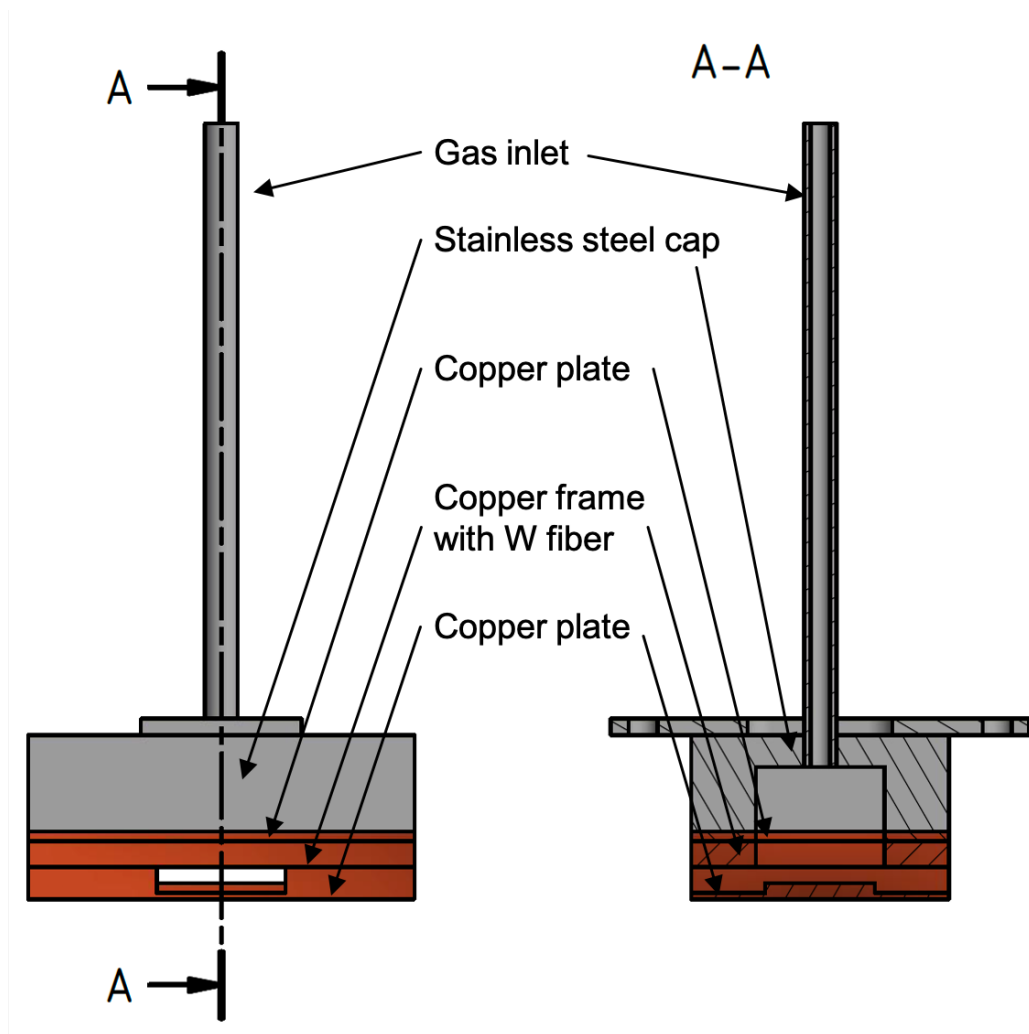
Technical drawing of the set up for the fabrication of the single fiber composites.
